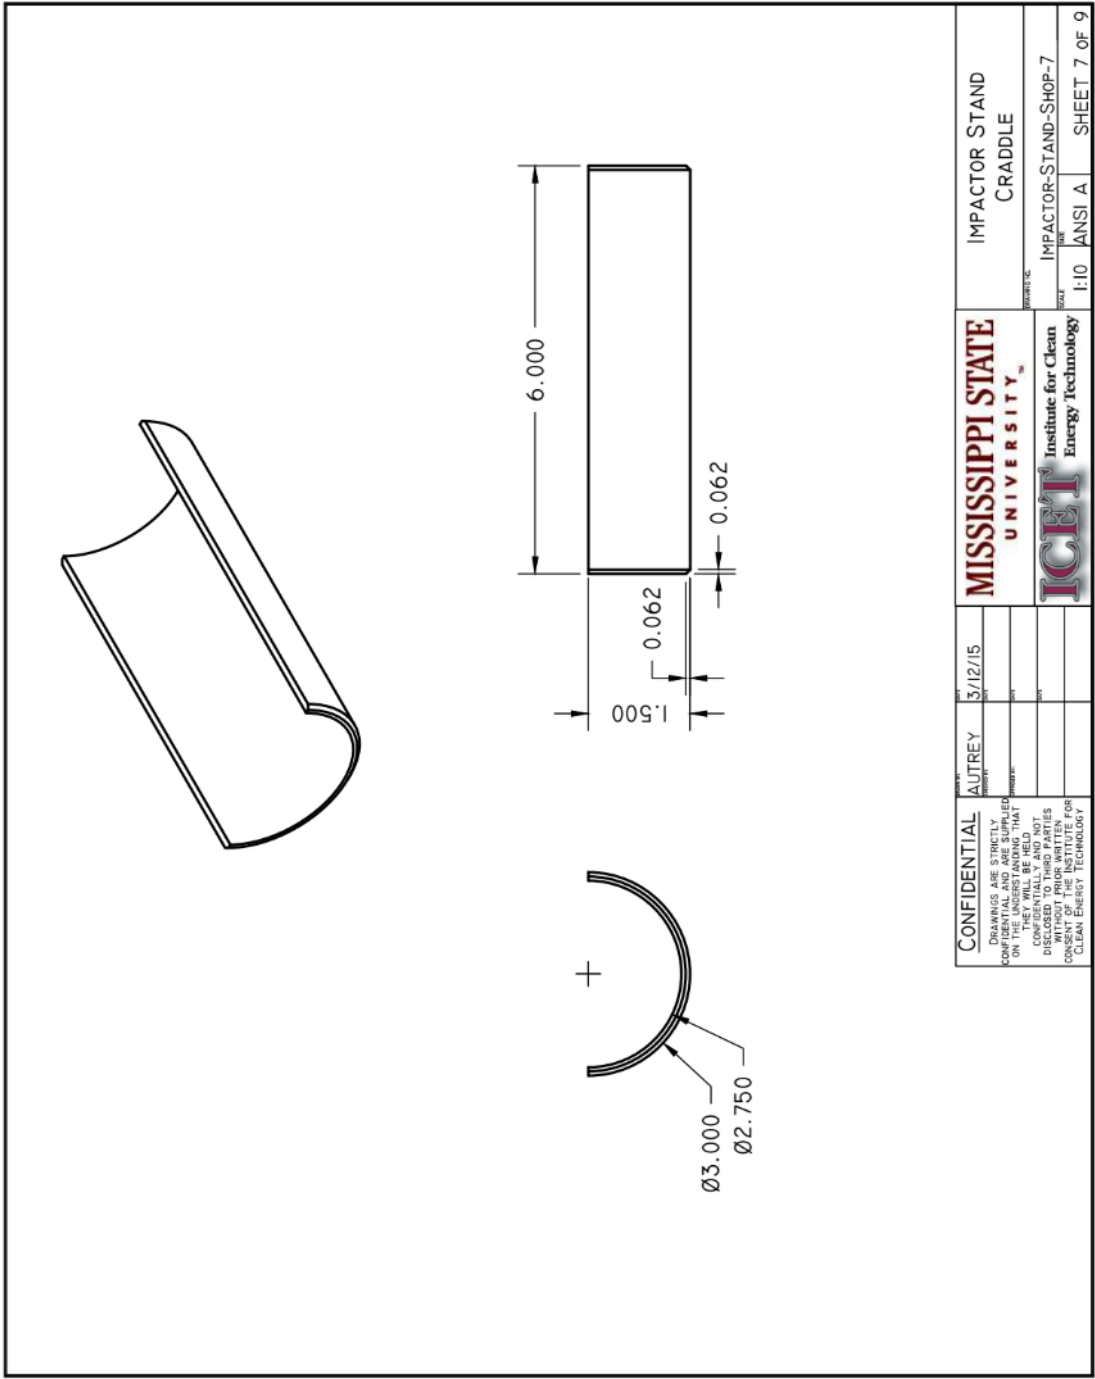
CAD drawing of the Pilat impactor retaining cradle.
